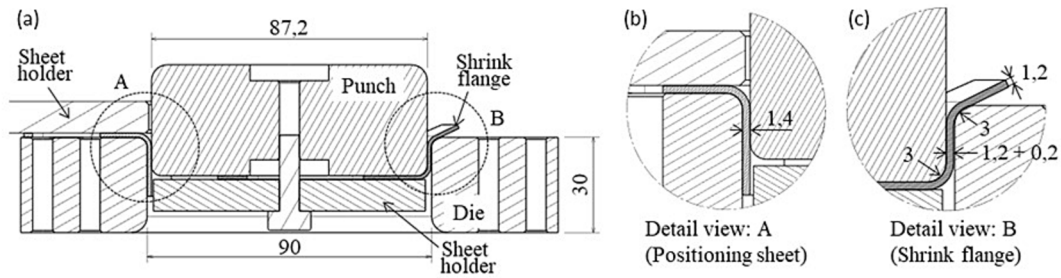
(a) Section view of the elements of the shrink flanging setup for CPF. (b) Detail view representing the positioning sheet and its thickness. (c) Detail view of the flange depicting the fillet radii, the sheet thickness.
